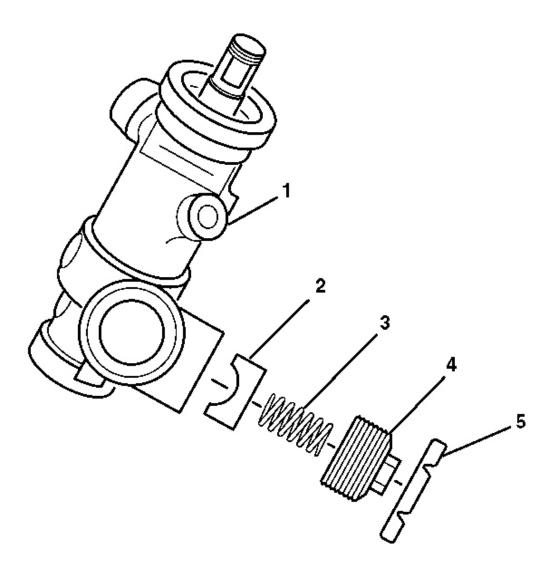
View Of Adjuster Plug, Plug Lock Nut, Spring & Rack Bearing Courtesy of GENERAL MOTORS CORP.
